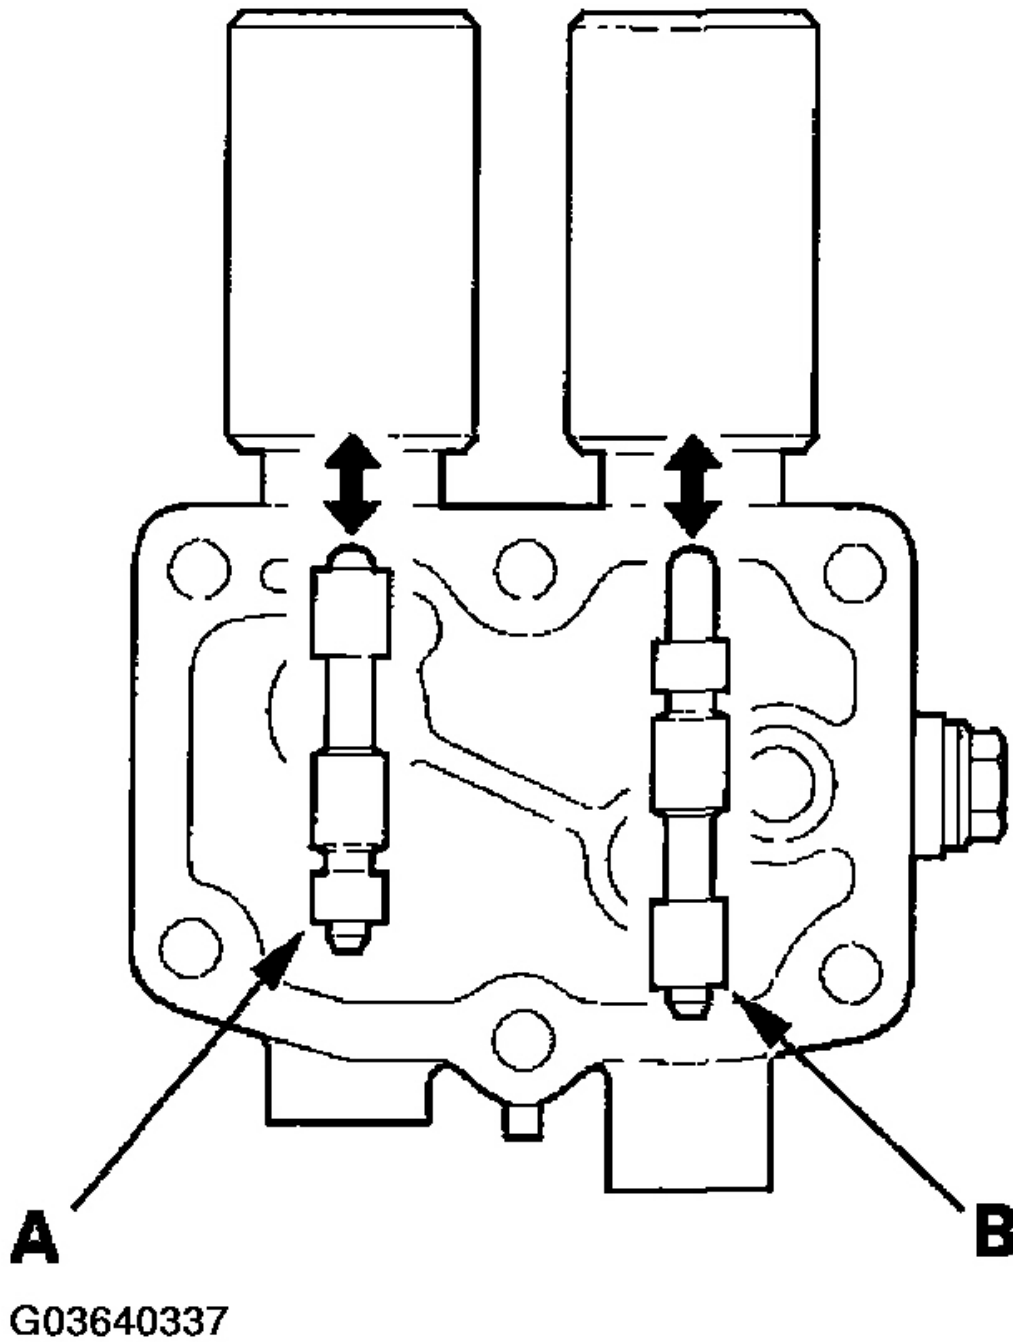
Connecting Battery Positive Terminal To No. 1 Terminal Of A/T Clutch Solenoid Valve A And B Connectors
